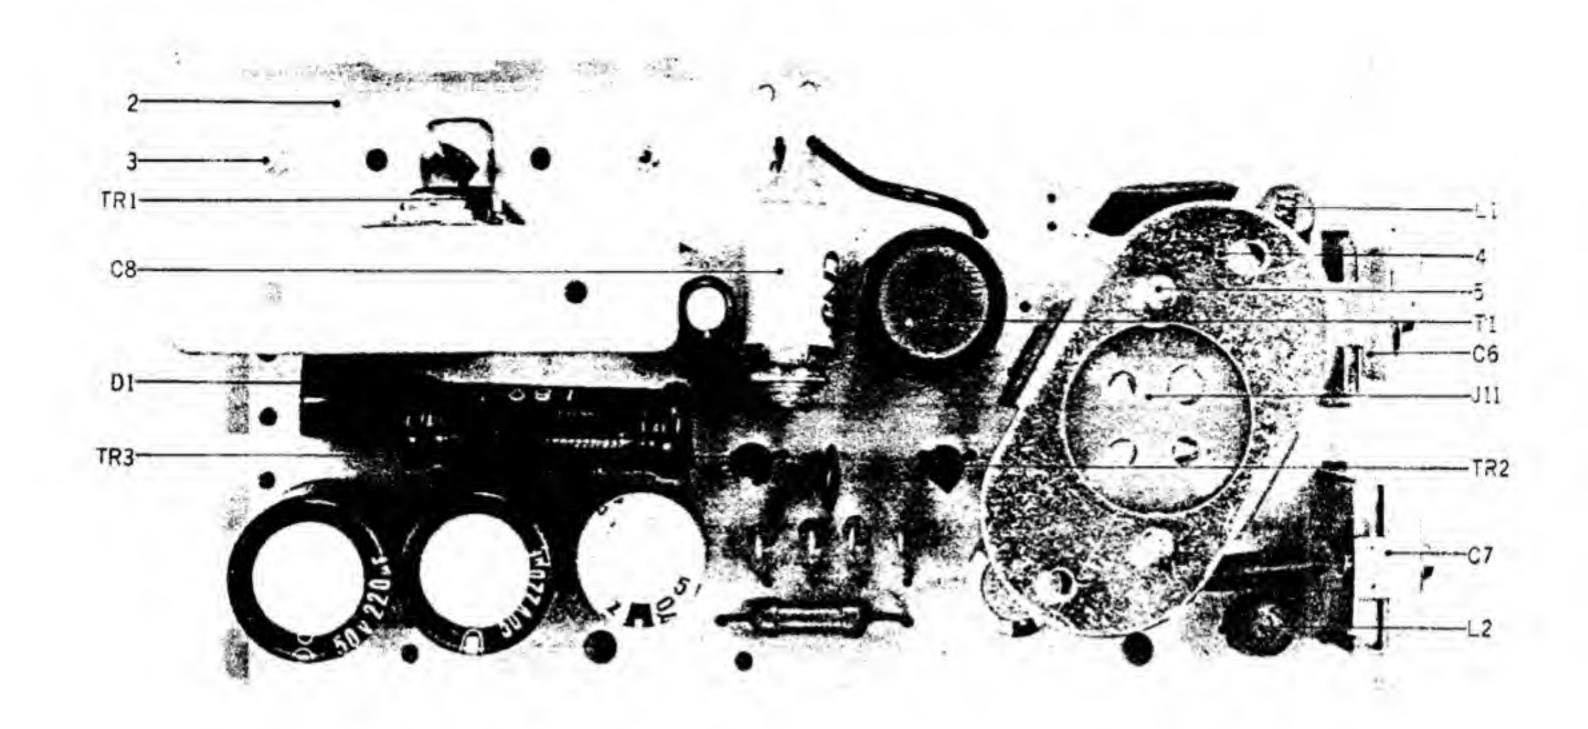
ILLUSTRATION OF MECH. ASSEMBLY BLOCK
